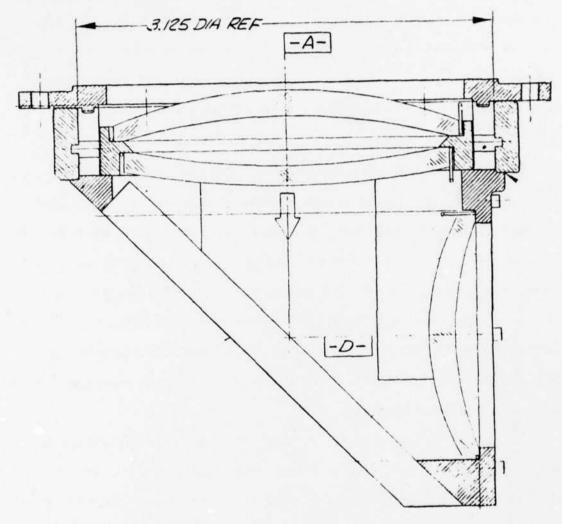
Mechanical Layout of IR Imager, PN SM-D-804143
